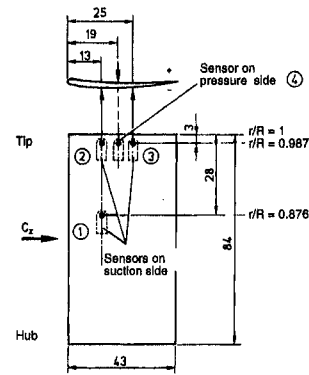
Schematic of pressure sensors mounted on the impeller blade
